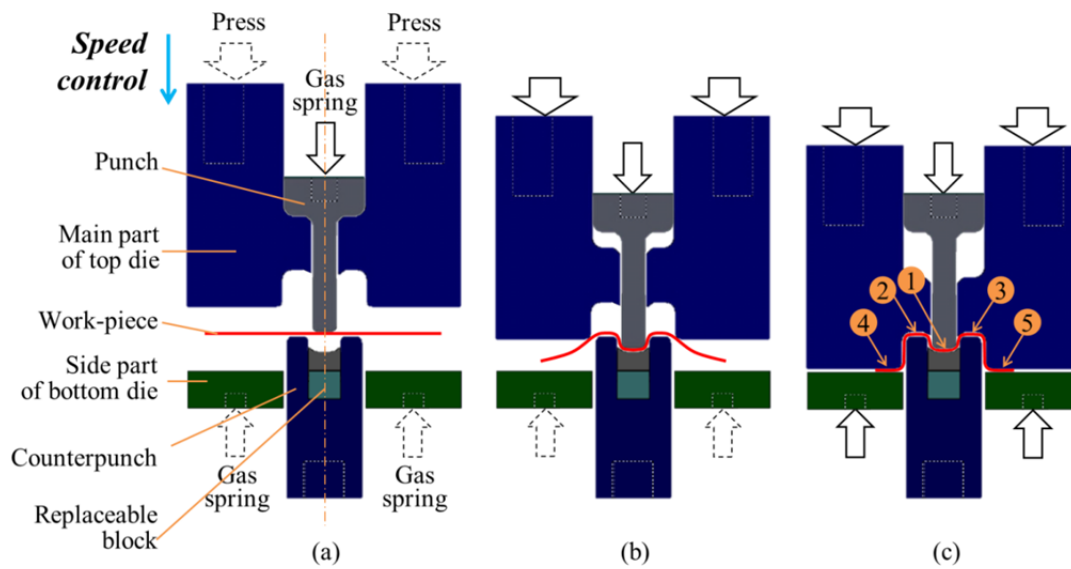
Schematics illustrating the working mechanism of the tool set and material flow of the work-piece (a) Start of forming (b) during forming, middle groove has been formed (c) final stage of forming
